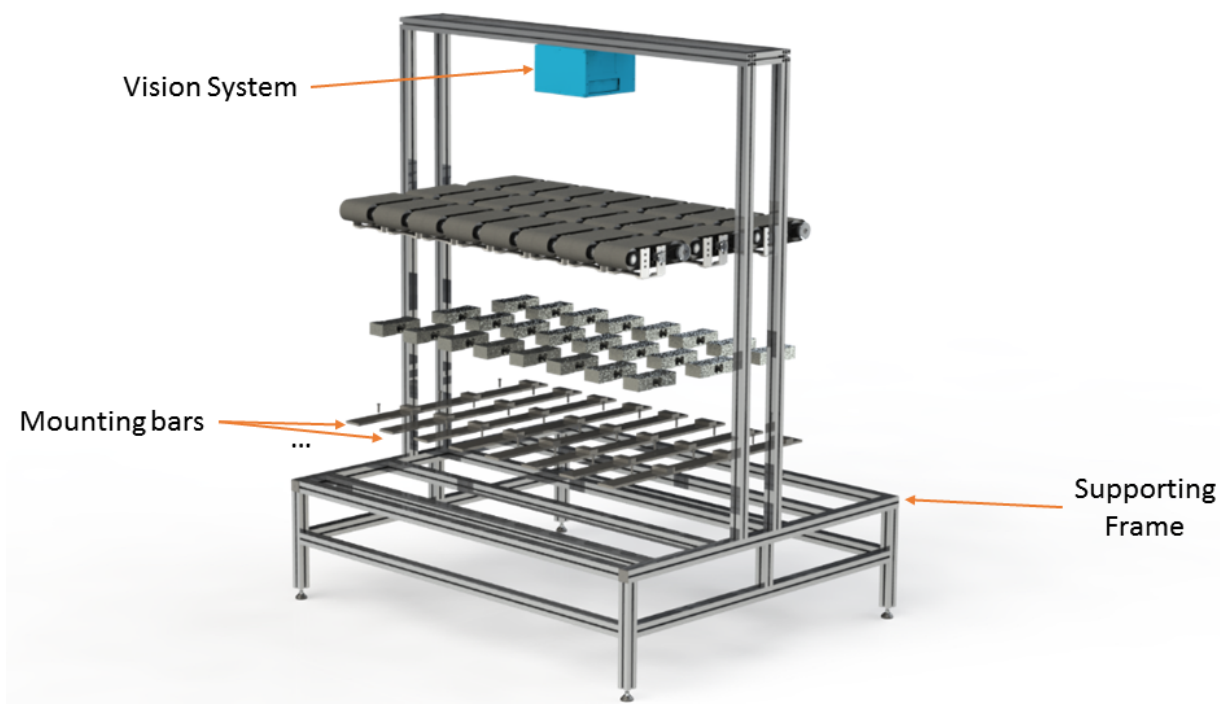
Rendered exploded view of the complete weighing machine solution.
